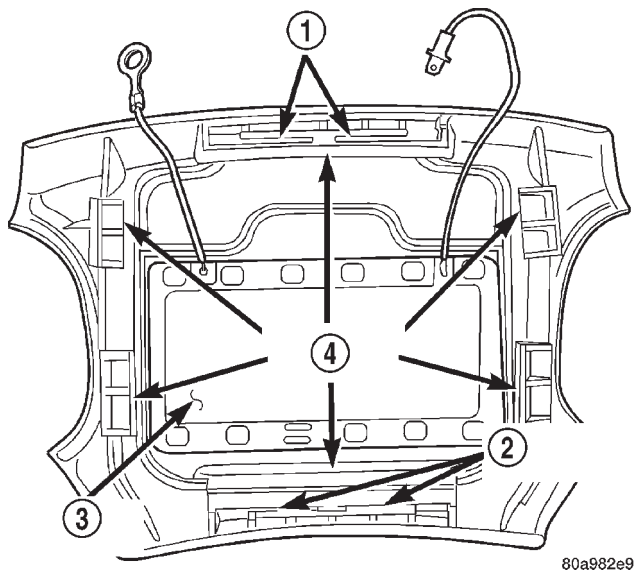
Driver Side Airbag Module Trim Cover and Horn Switch
